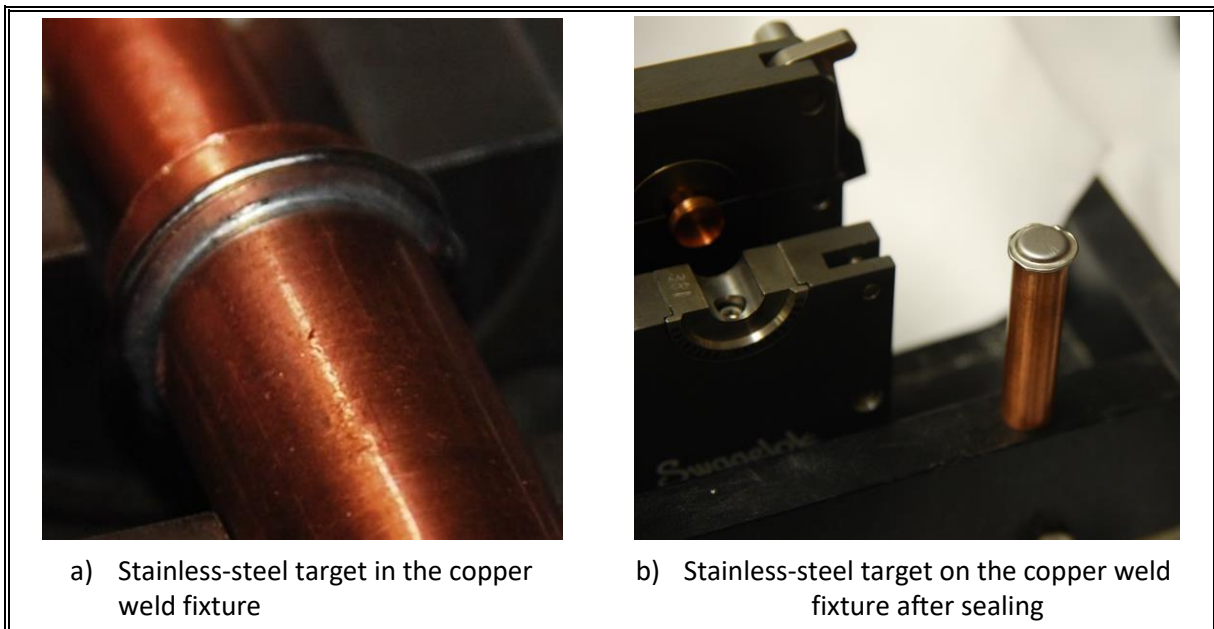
Stainless-steel target with the copper weld fixture
